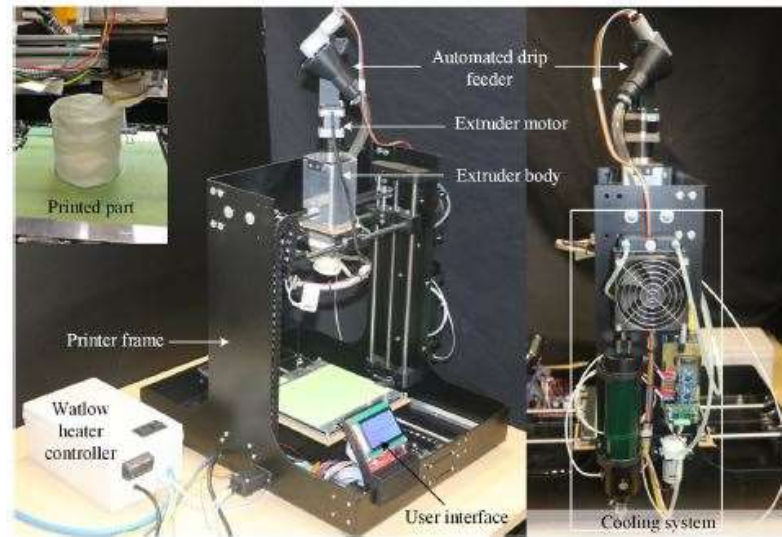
19 Setup used for 3-d printing of PLA [21]
